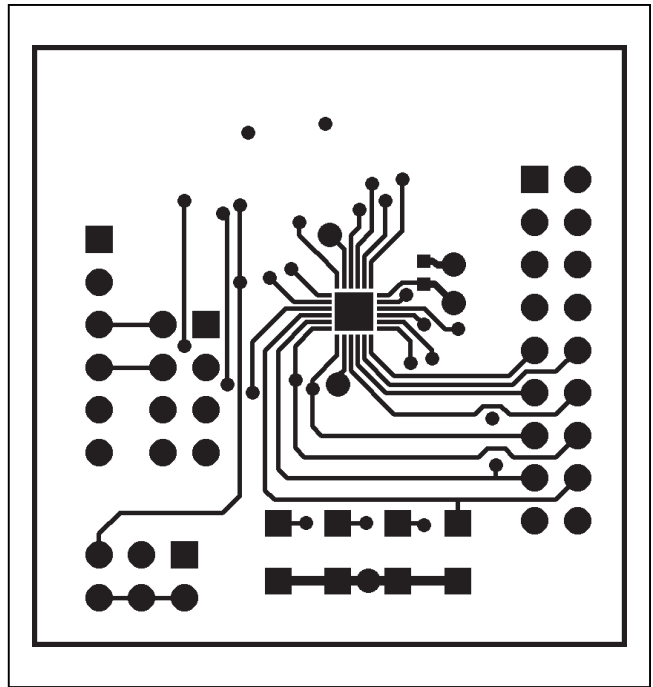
MAX7304PMB1 Peripheral Module PCB Layout—Component Side
